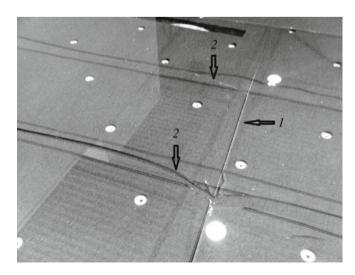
Off-cut fracture: 1) main cut; 2) undesirable off-cut cracks.
